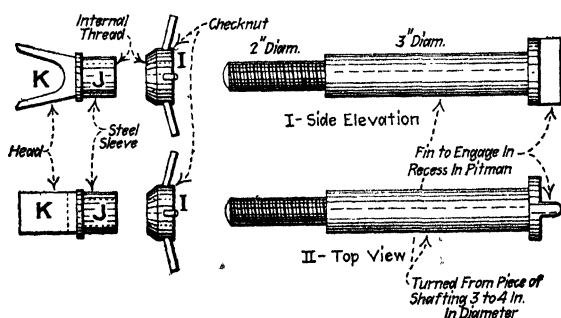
Details of the ram "G" in the straightener of Fig. 279.
